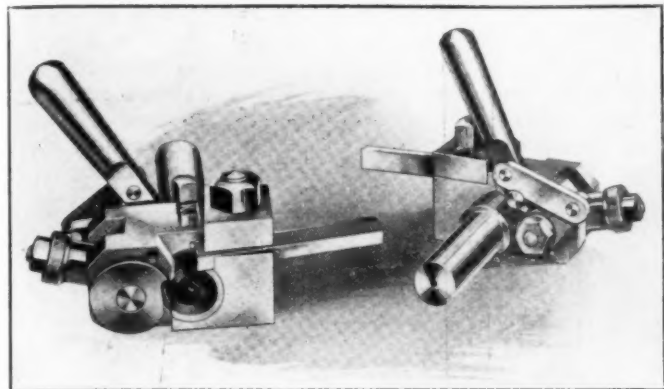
OVERSHOT BOX TOOL WITH CIRCULAR CUTTER ATTACHMENT.
